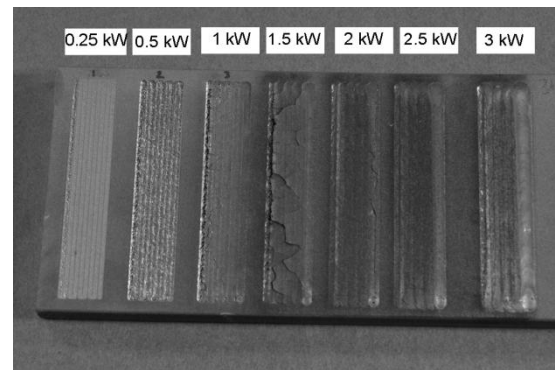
Coatings produced by Laser Fusing showing visible cracks on coating with various Laser conditions
